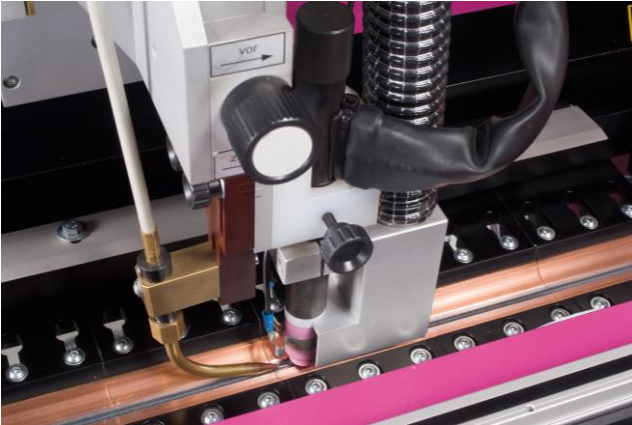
Welding fume extraction for e.g. galvanized steel, directly mounted at the torch
